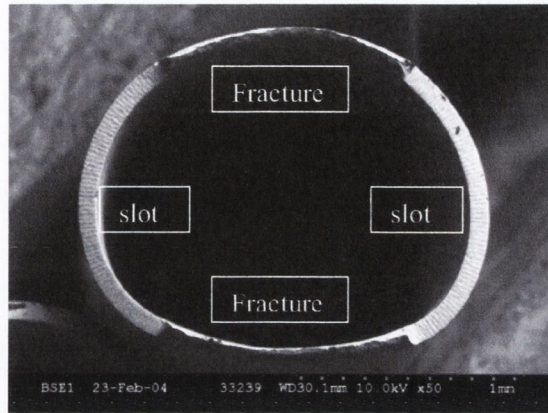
Tensile fracture surface of a tubing specimen
